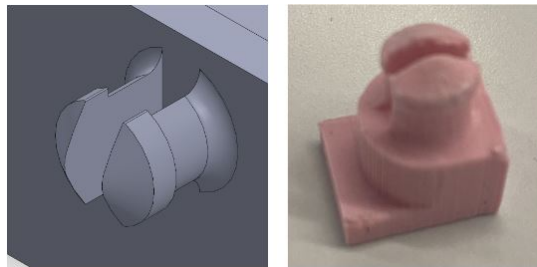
An example of a pitch bearing used for attaching the four bar linkage.
